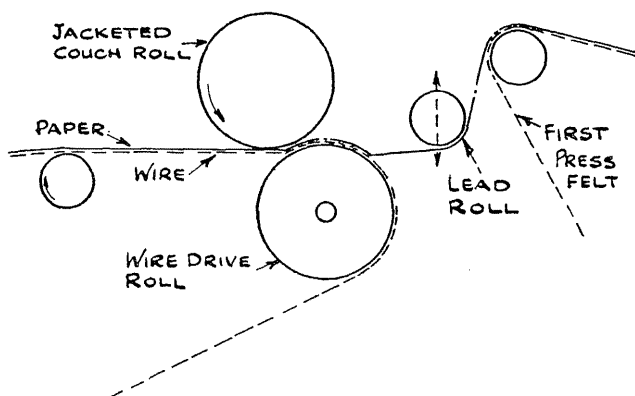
Preferable arrangement of open draw with a jacketed top couch roll
